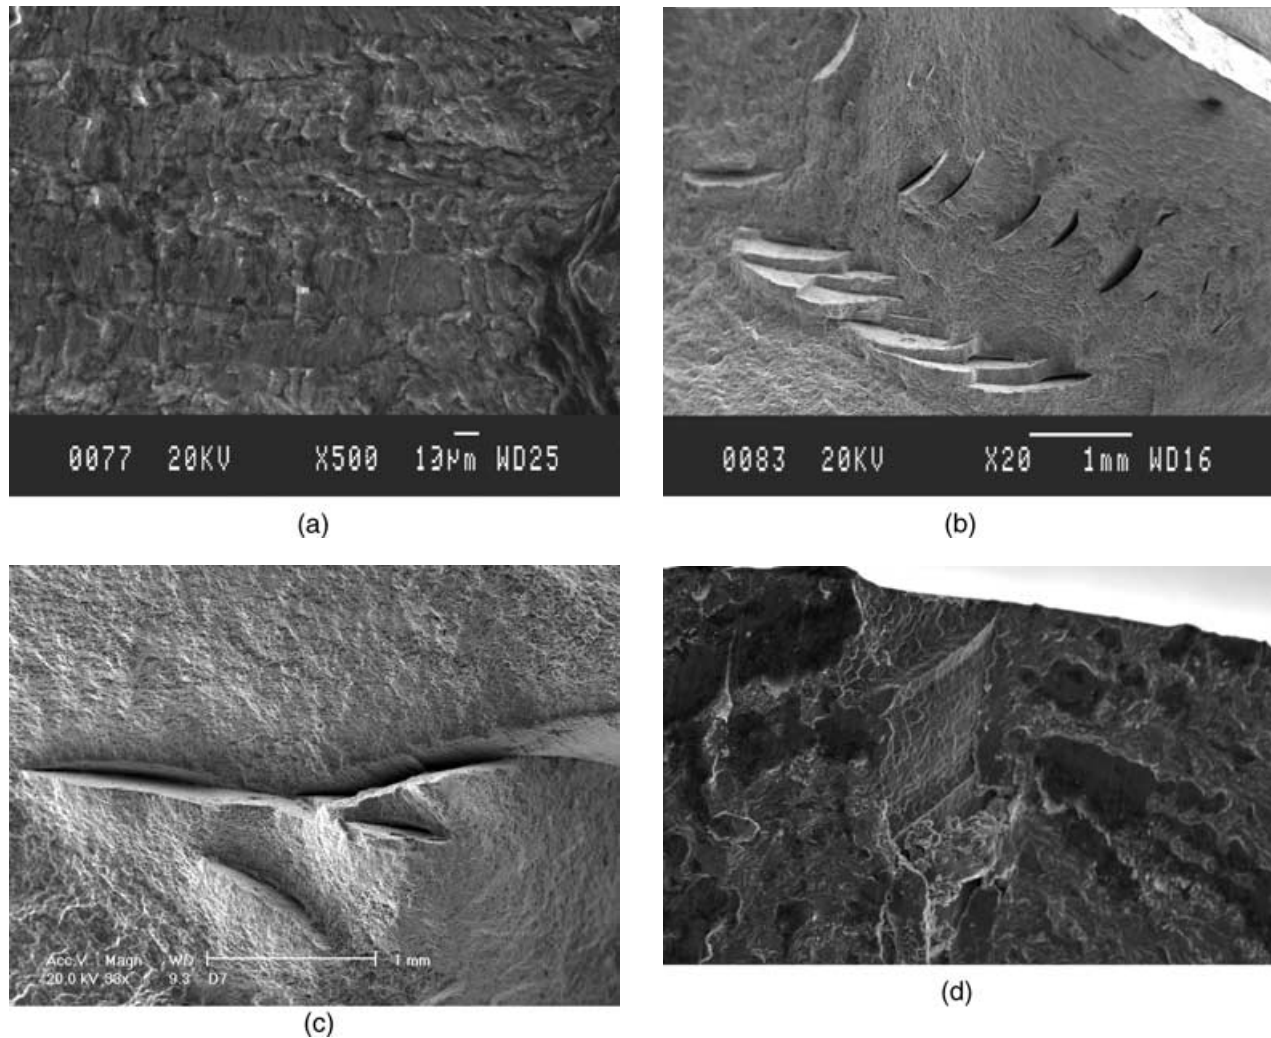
(a) Banding texture on an FSW fracture surface near the crack-initiation site. (b) Planar facets on the fast fracture region of a bend fatigue specimen. (c) Planar facets on the fast fracture region of a tension specimen. (d) Layer interface linking two small fatigue cracks.
